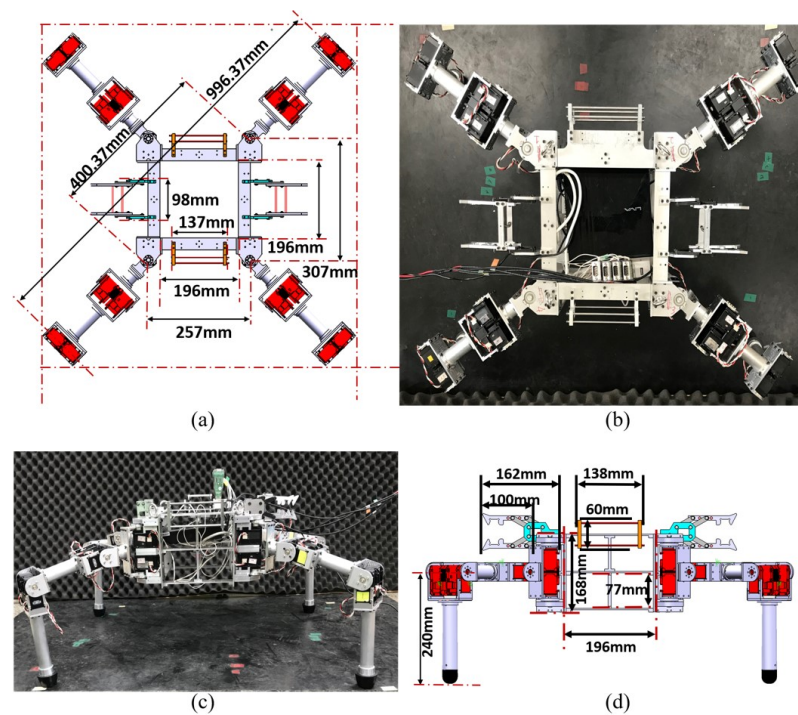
Design of the robot's body. (a) Top view of the robot design in Catia. (b) Top view image of the robot. (c) Front view image of the robot. (d) Front view of the robot design in Catia.
